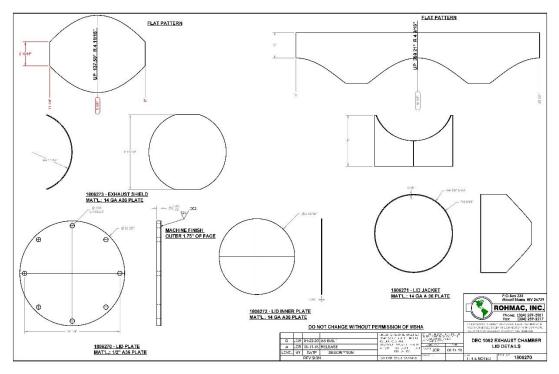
Revised Diesel Power Package Exhaust Lid Detail Drawing
